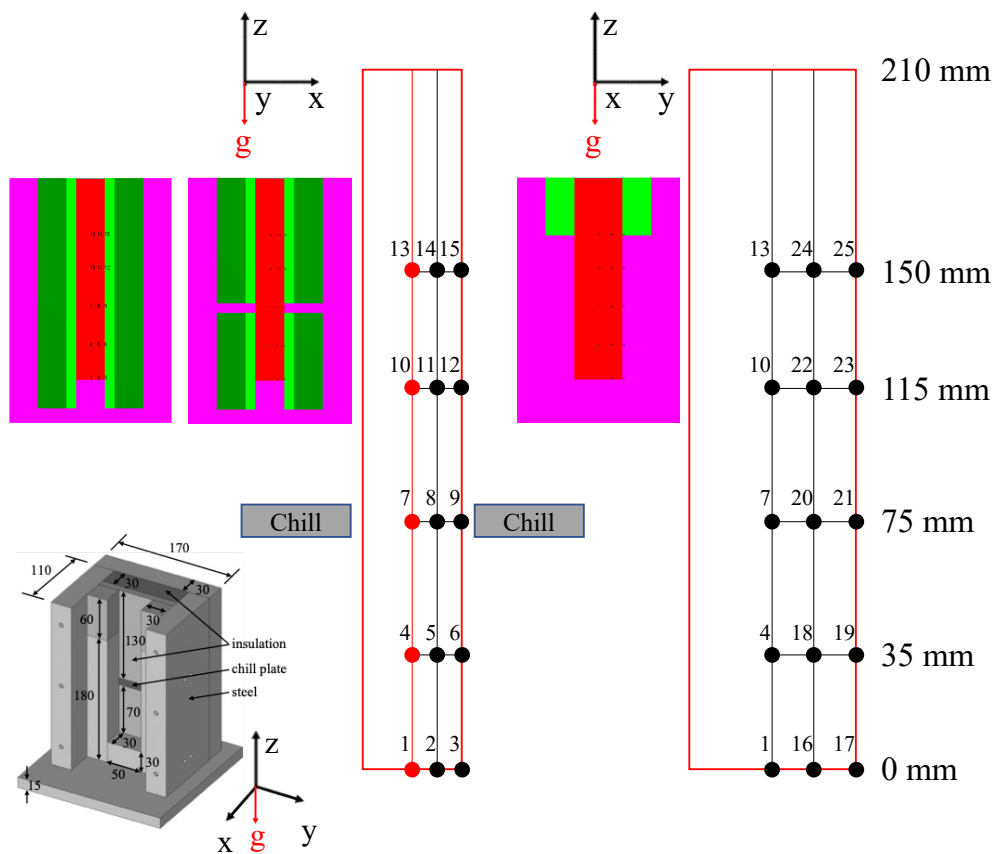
Schematic drawing of the mold without or with chill plates, and the positions of the recording points.
